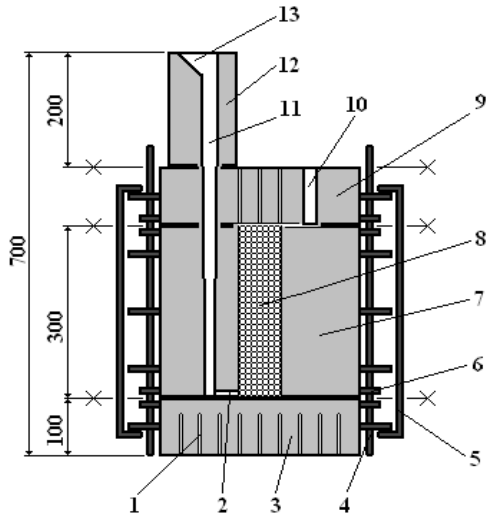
Mould for skeleton casting: 1 – degassing channels, 2 –ingate, 3 – lower part of the mould, 4 – lifting pins, 5 – clamp, 6 – grip, 7 – central part of the mould, 8 – mould cavity and ceramic core, 9 – upper part of the mould, 10 – over flow, 11 – getting system, 12 – pouring part, 13 – pouring basin
